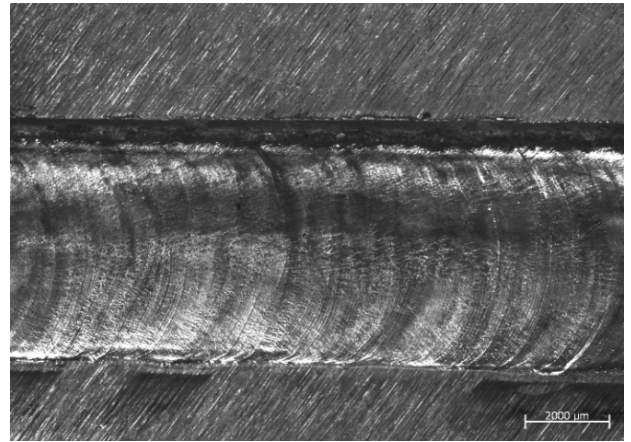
Part shape of bead face of the high speed steel HS6-5-2-5 surface alloyed with the Si_3N_4 , laser power 1.7 kW
